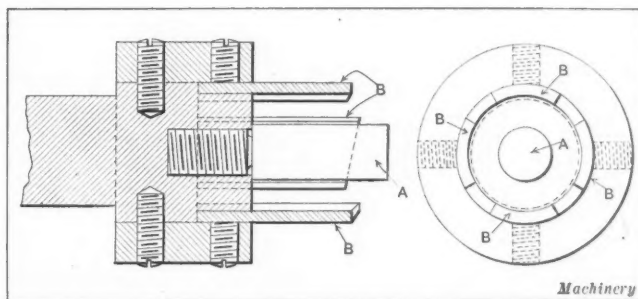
Tool used for boring Arbor Hole in Circular Saw Blades
